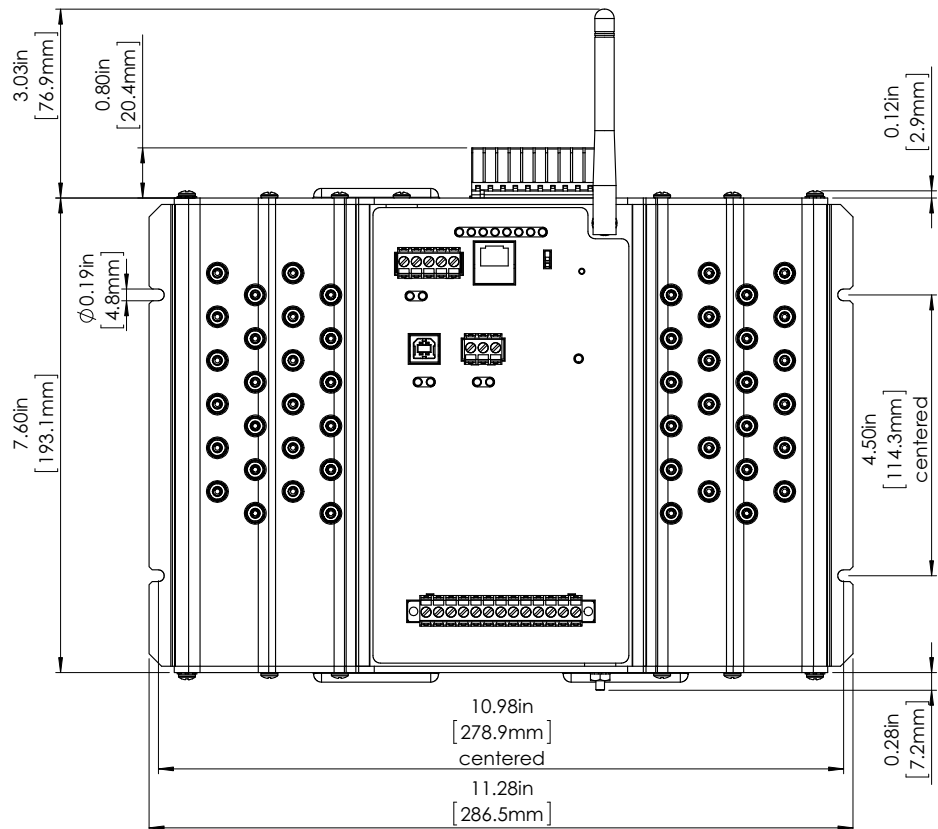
EPM 4600 Unit Front Dimensions
